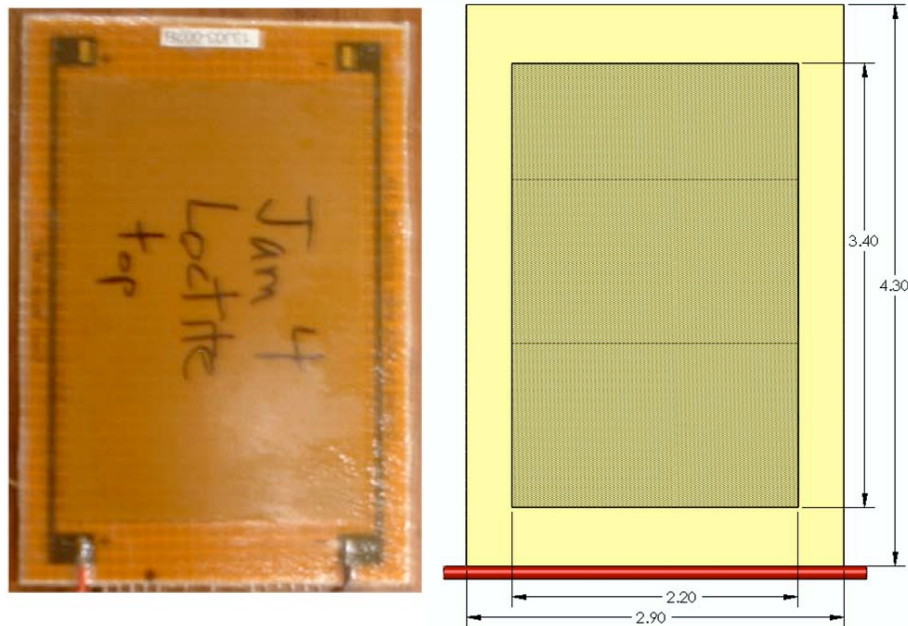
Photograph of Actuator (left) and Drawing of Actuator with Dimensions in Inches (right).
